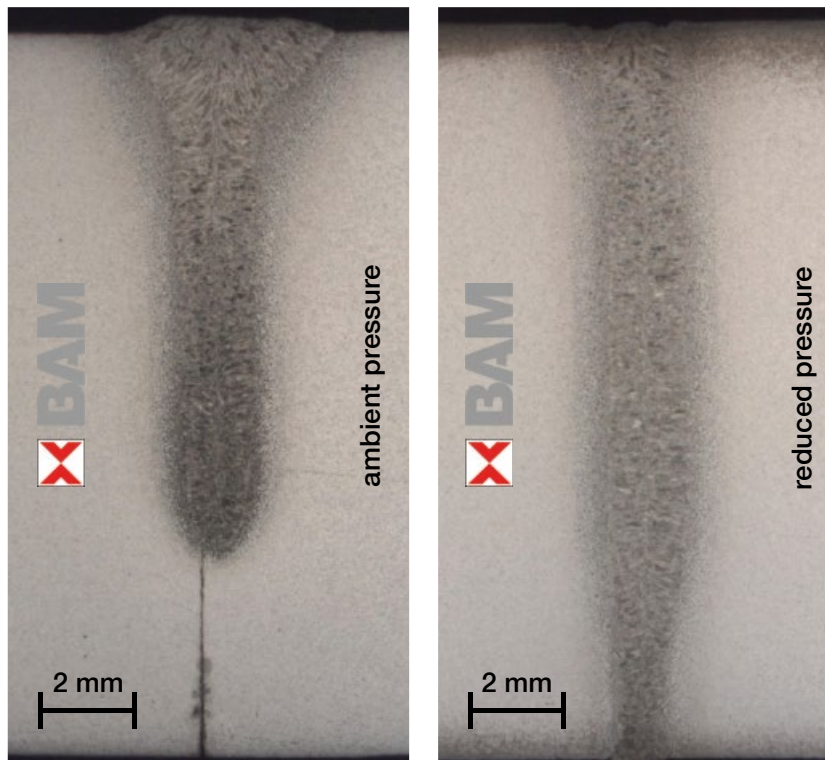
Macrosection of 15 mm steel, laser beam power 7 kW, welding speed 0.75 m/min.
